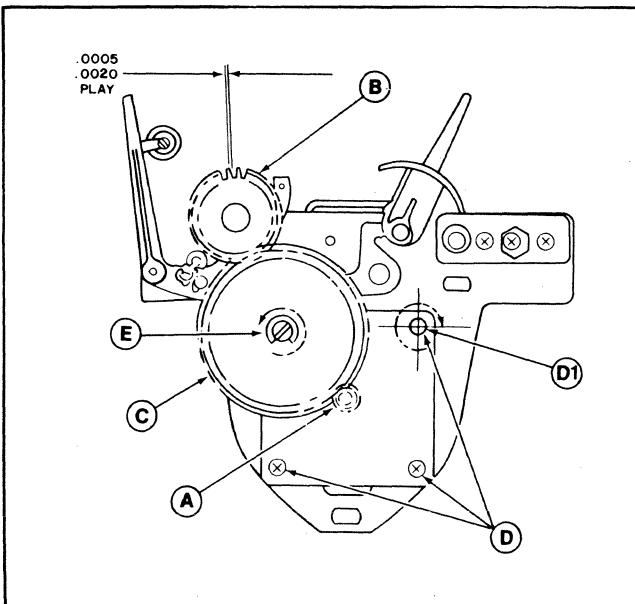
Paper Feed (Platen) Drive Adjustments
